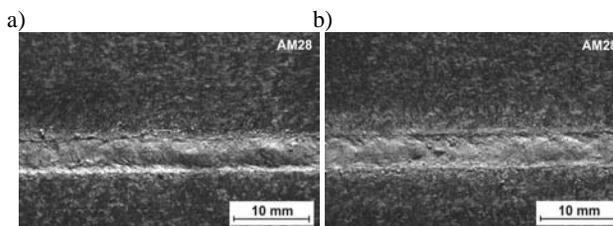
Typical EB weld appearance of the 2N11K13H3M high cobalt maraging strip of 3 mm thickness: a) face side, b) root side
